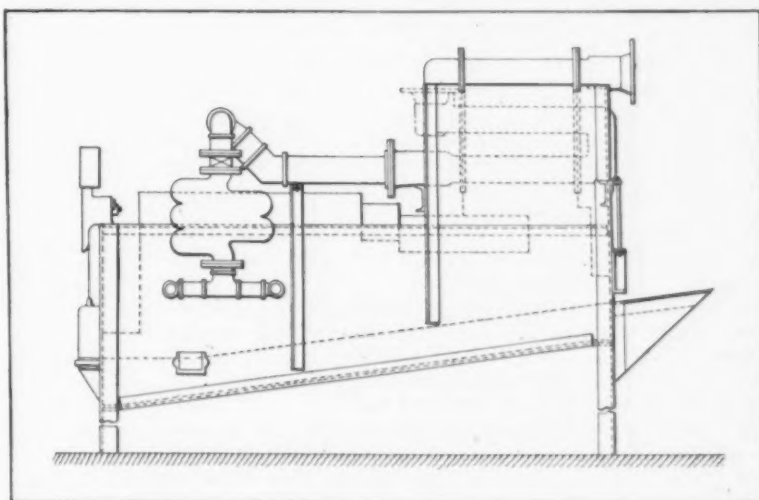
A Continuous Forging Furnace for Drop Forgings
